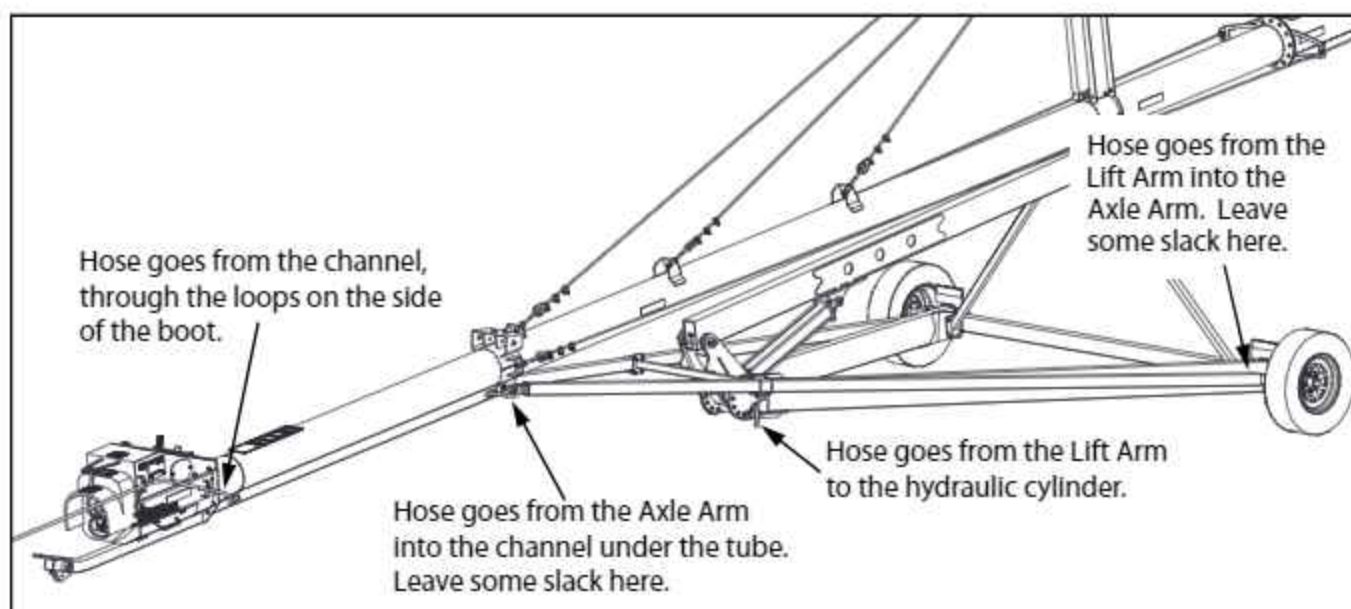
Routing the Hydraulic Hose through the Undercarriage
